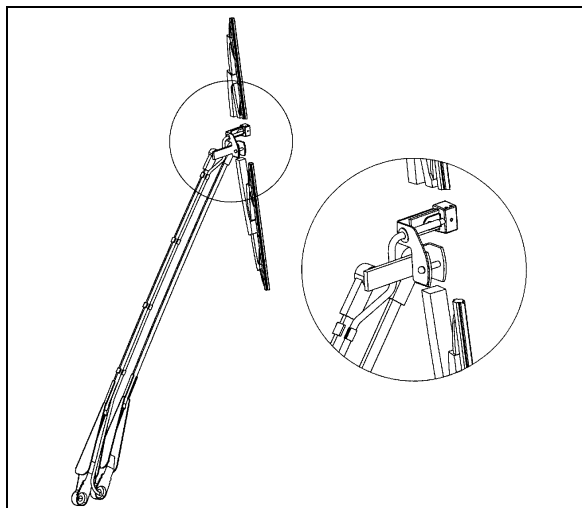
WINDSHIELD WIPER (DRIVER SIDE) 23328
